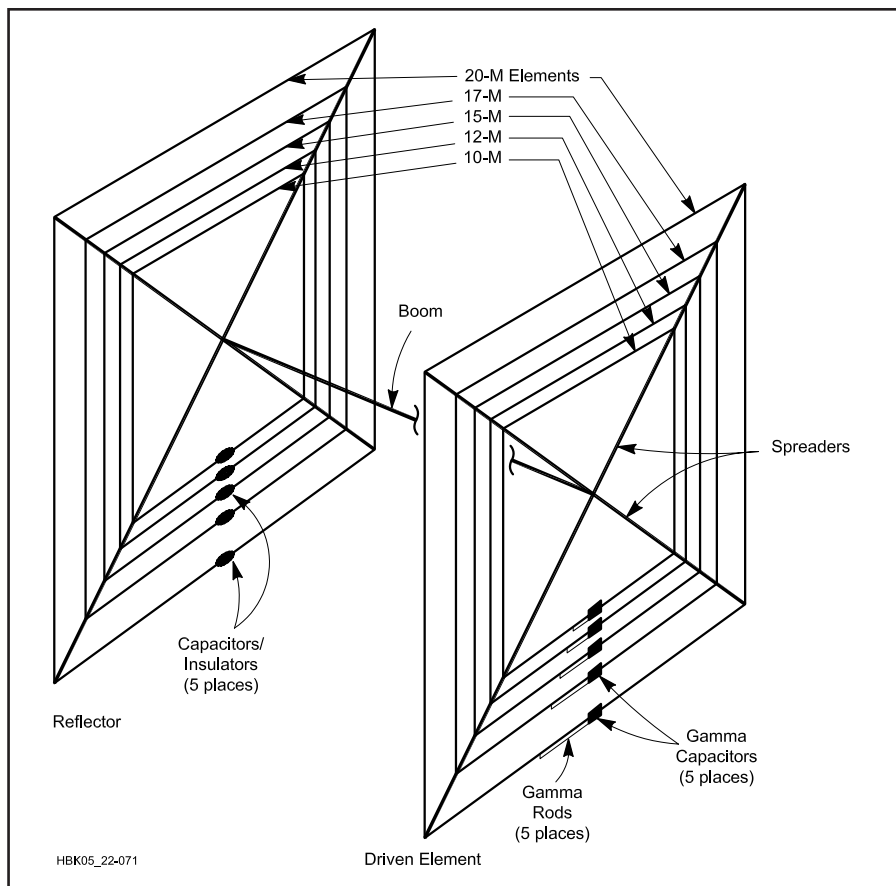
Mechanical layout of the five-band quad. The boom is 8 ft long; see Table 22.19 for all other dimensions.
